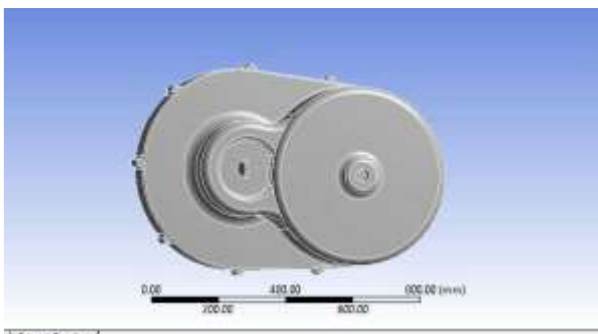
Modelling of the Electric Vehicle Gearbox Casing
